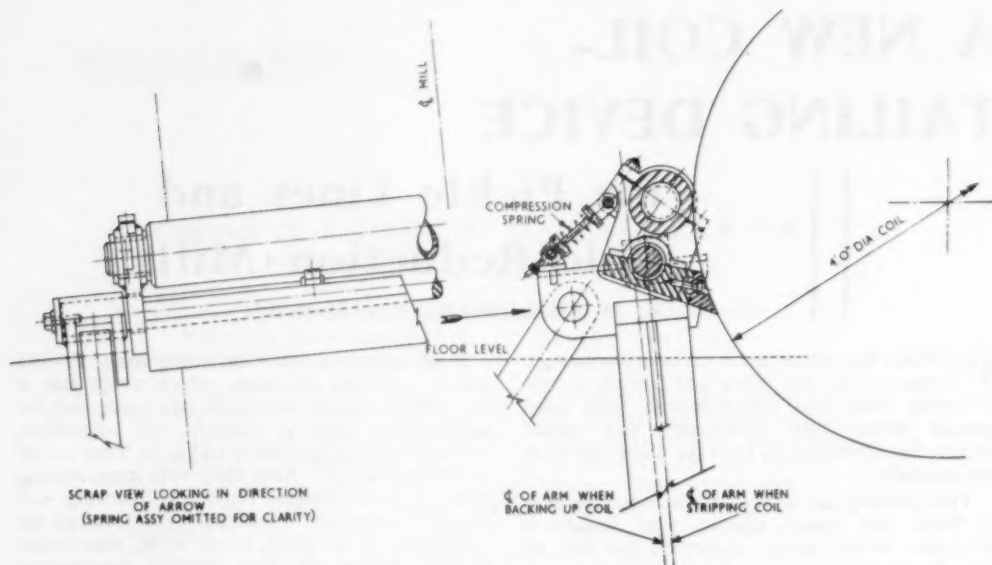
Drawing showing knife and roller of coil-tailing device
